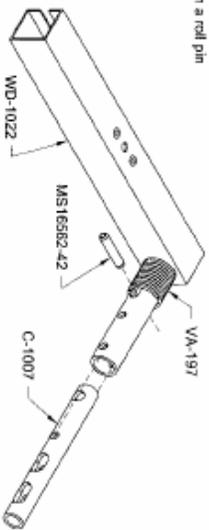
BEGIN LATCH MECHANISM ASSEMBLY
